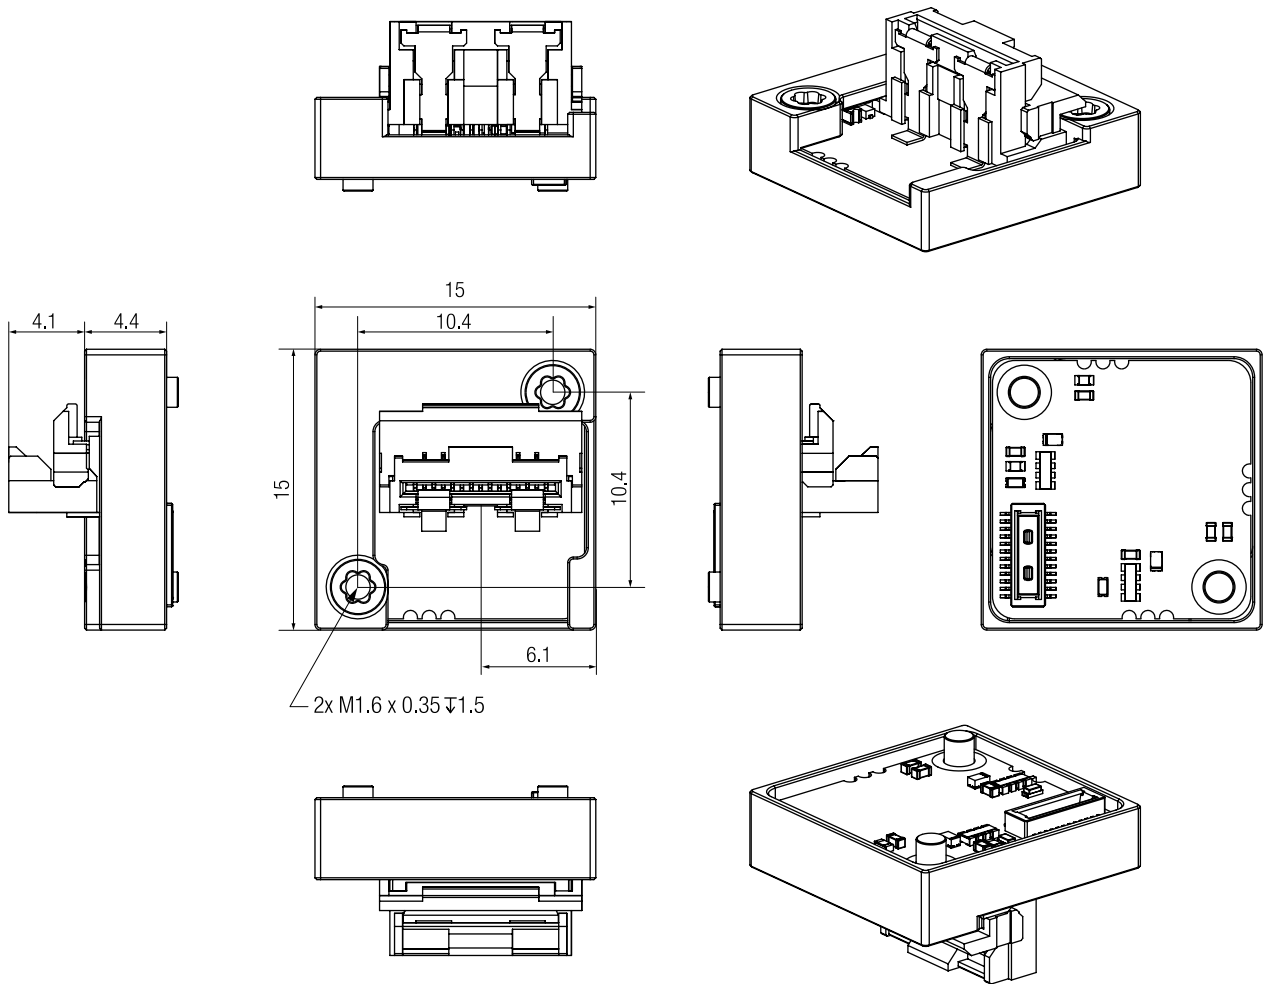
Dimensional drawing of ADPT-MU-CX3-FV
